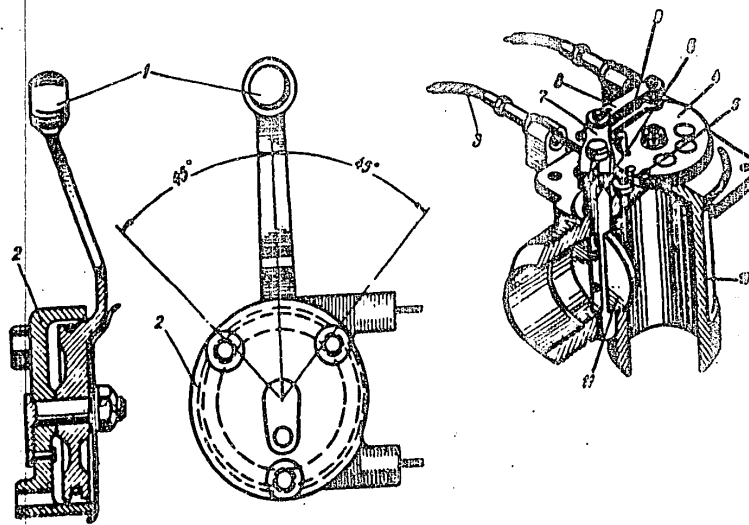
COCKPIT AIR SUPPLY VALVE AND ITS CONTROL SECTION
